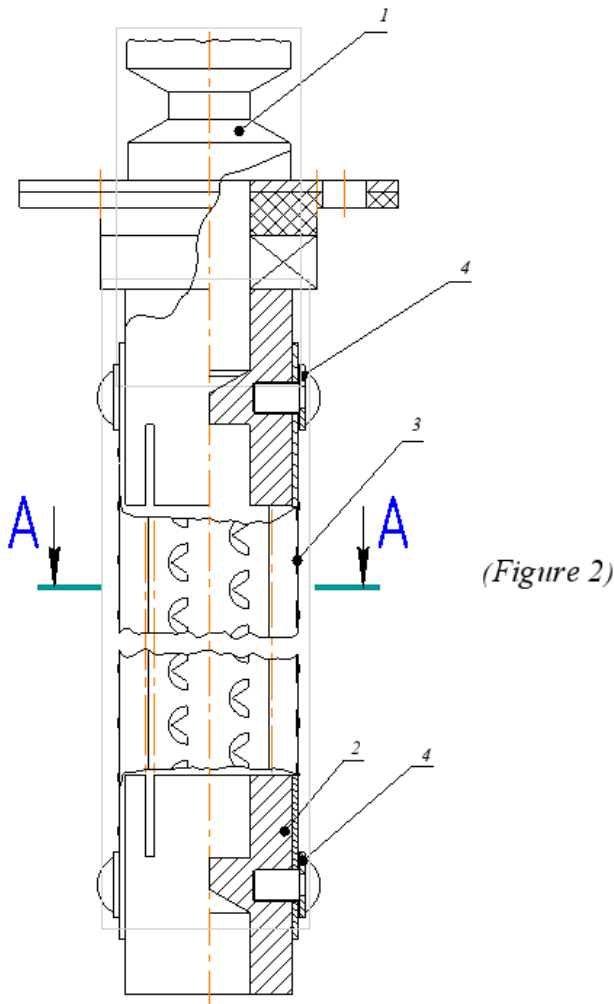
General appearance of the spindle. 1 – Drive roller; 2 – Lower part of the spindle; 3 – Lightweight gripping part; 4 – Connecting ring.
